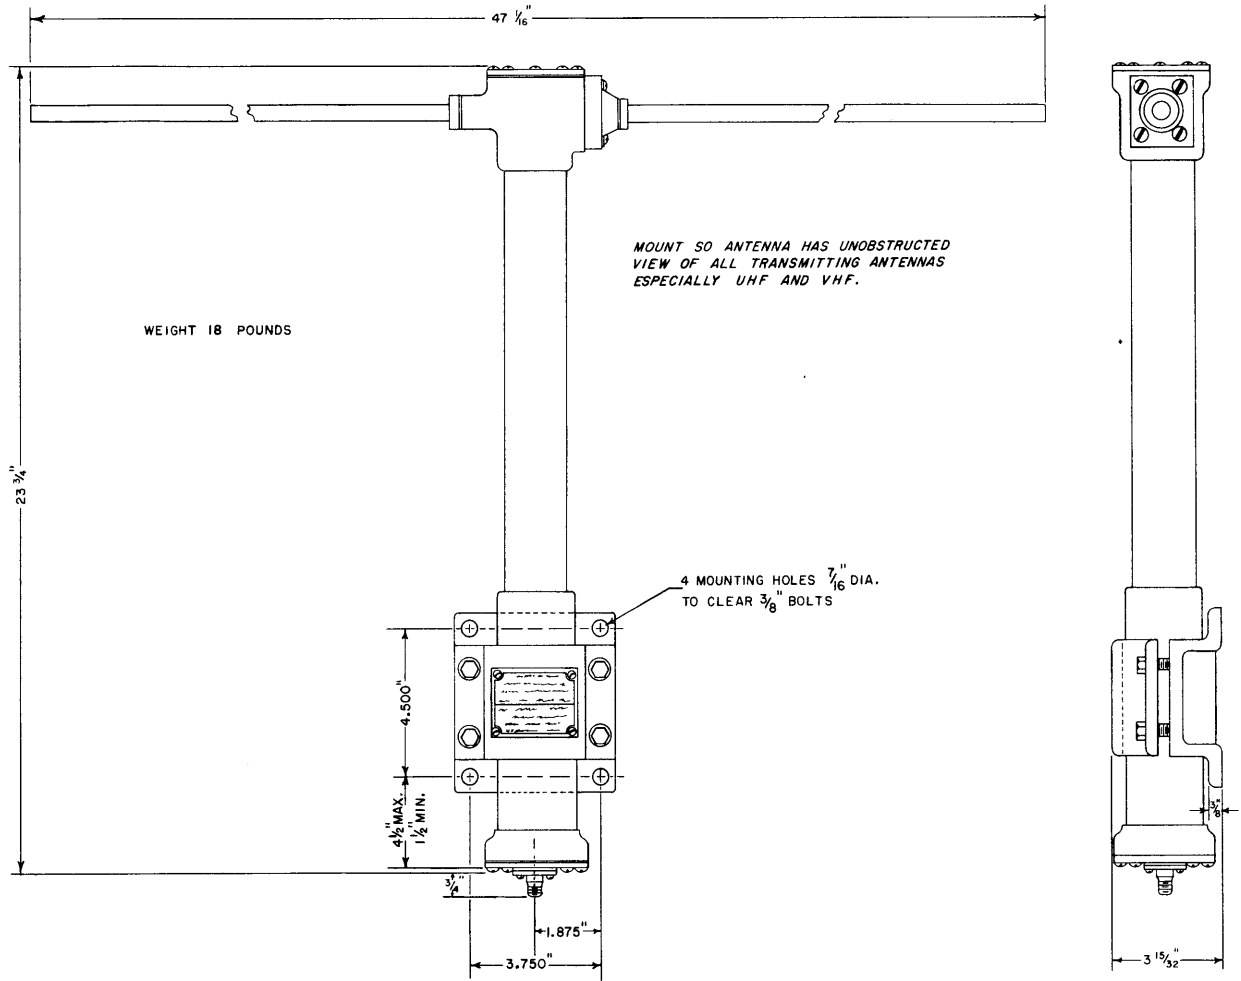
Outline Dimensional Drawing, Antenna Navy type -66095
